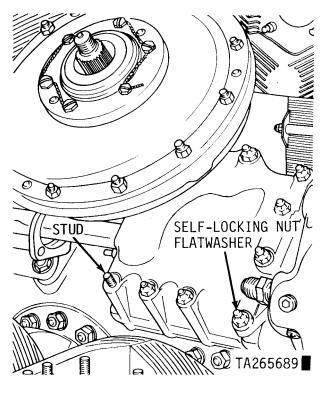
Removing or installing front fan drive housing attaching parts — front view.
